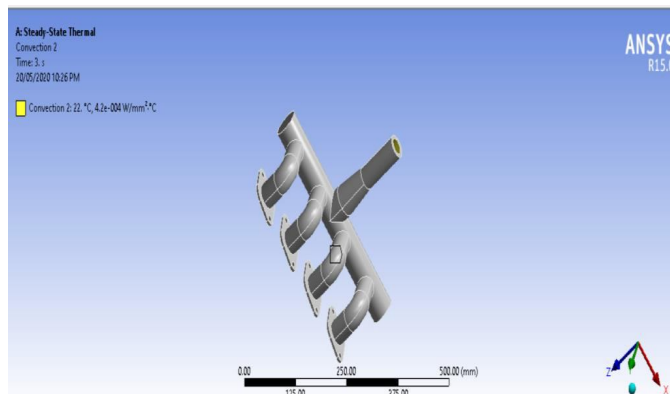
Exhaust gas convection is applied at the internal surface of the exhaust manifold
